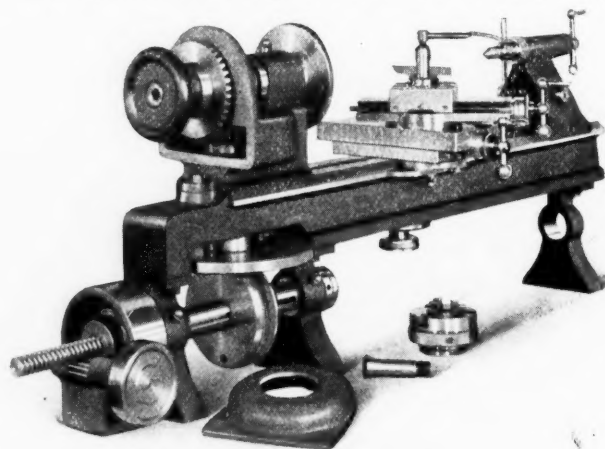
Another View of the Precision Lathe—Spindle Gear Guard removed referred to, meshes with a pinion attached to a handwheel on the outer edge of which is a speed indicator. By means of this handwheel, the friction driving wheel is shifted on the driven disk for obtaining any desired speed in either a forward or reverse direction. When the position of the disk is changed, the driving key slides in a slot cut in the hollow shaft. There is a depression in the center of the driven disk, so that the machine can be stopped independently of the
